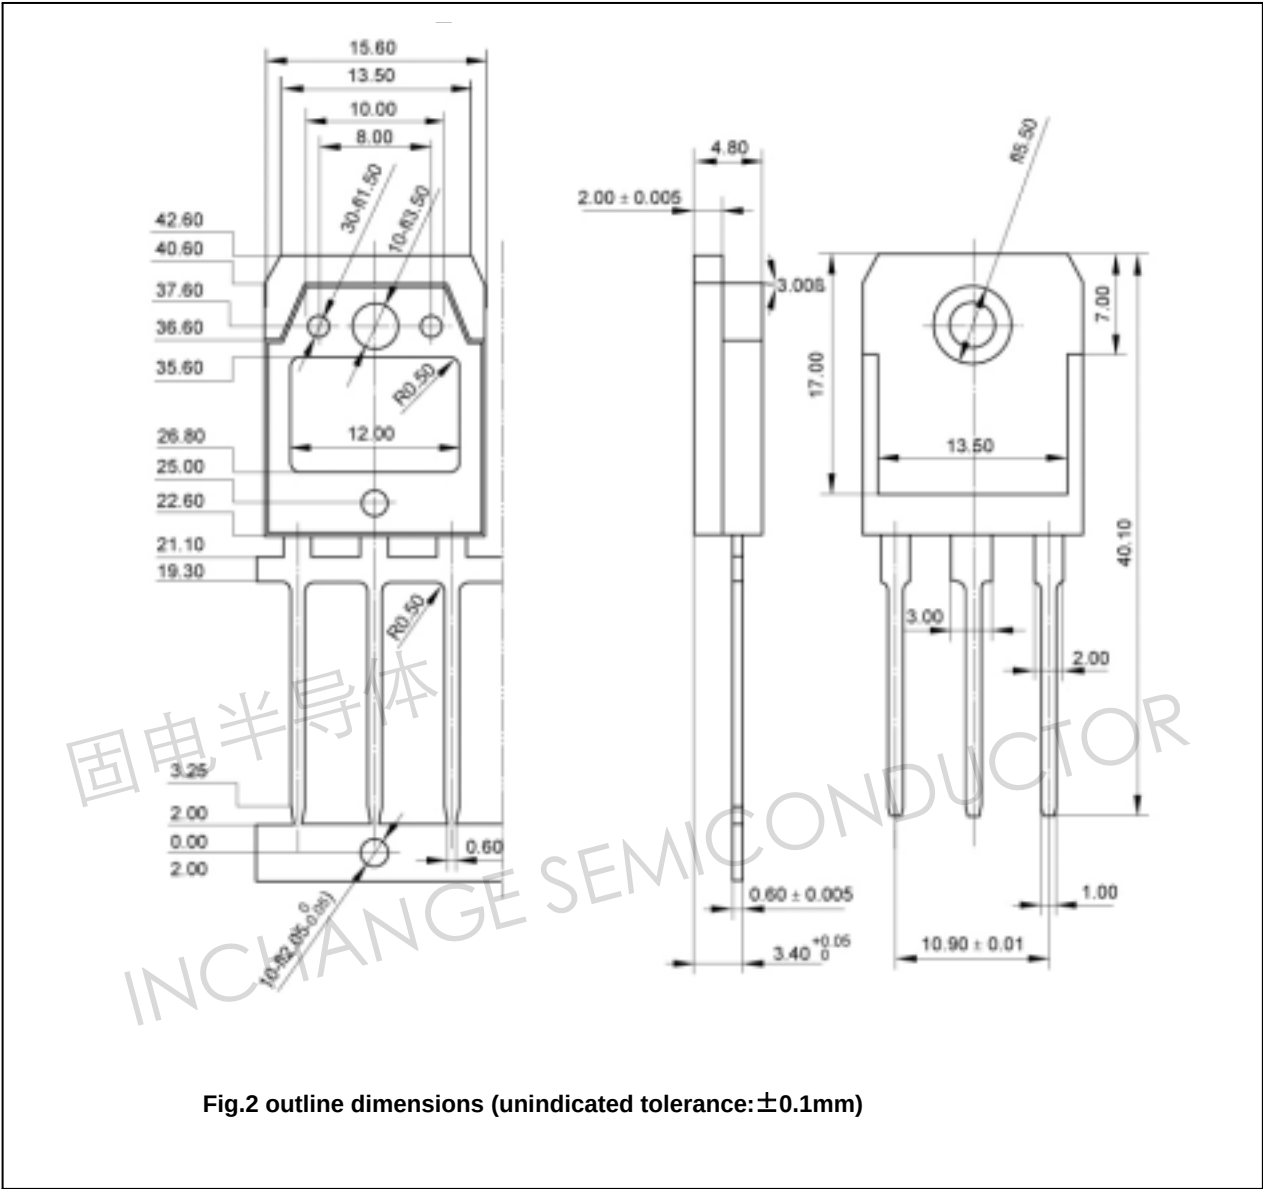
outline dimensions (unindicated tolerance:  $\pm 0.1\text{mm}$ )
